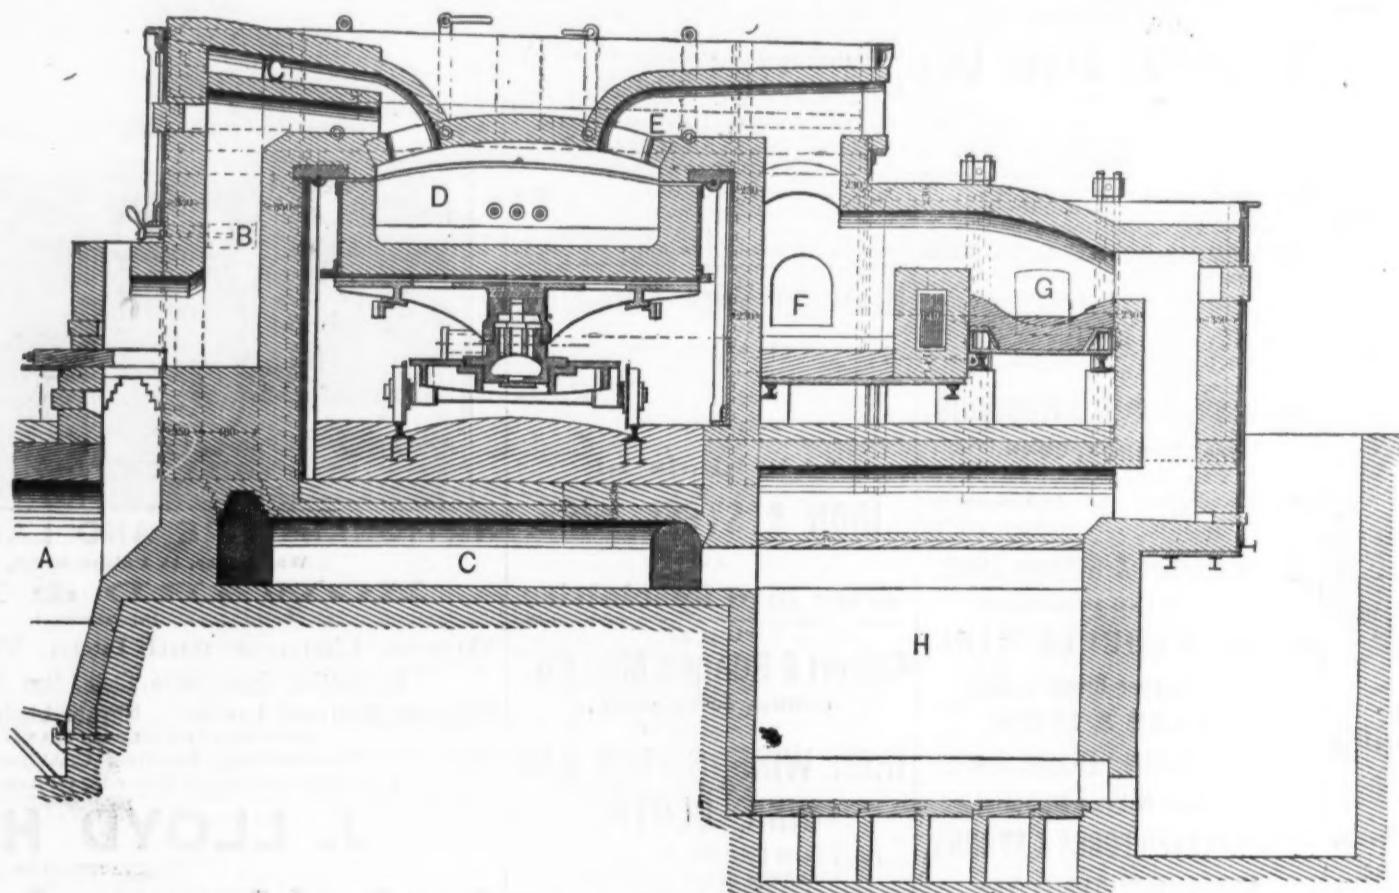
LONGITUDINAL SECTION OF THE PONSARD STEEL FURNACE.
